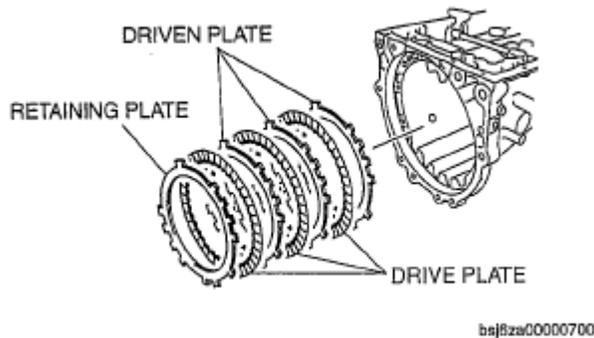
Identifying Drive Plate, Driven Plates And Retaining Plate
